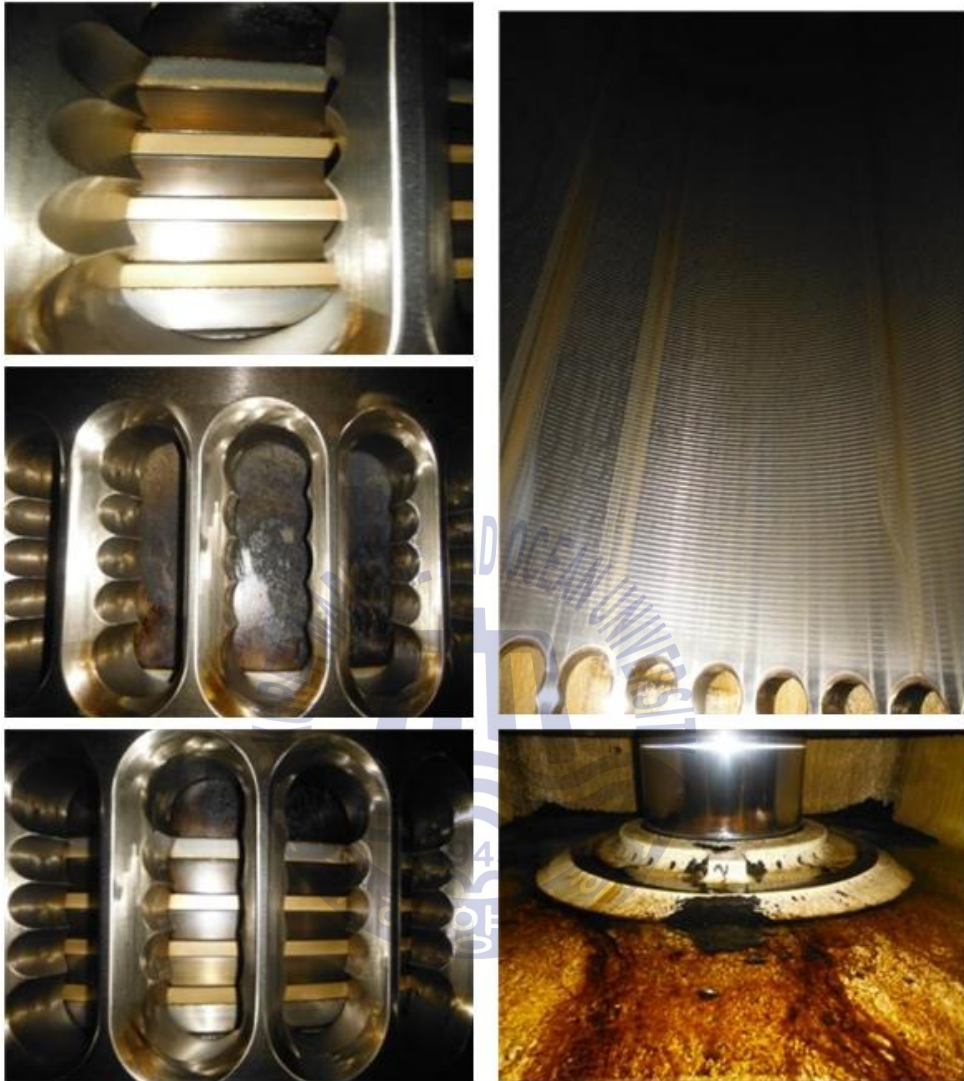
Piston and liner of NO.2 cylinder after using ULSFO
